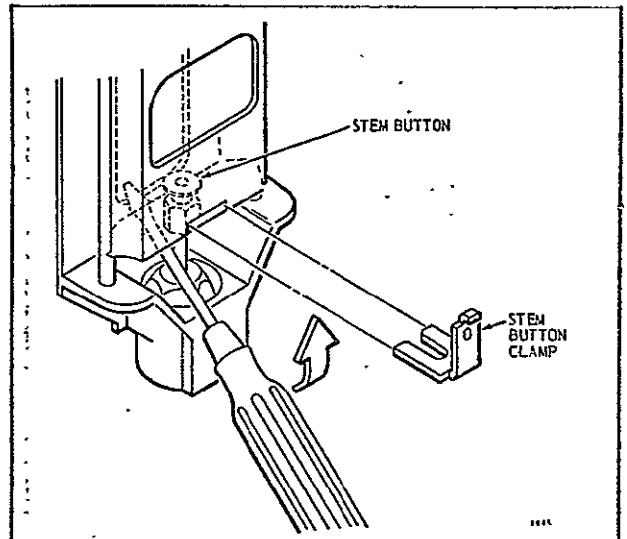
THE STEM BUTTON CLAMP FASTENS THE VALVE STEM TO THE LINKAGE SLIDE MECHANISM.
